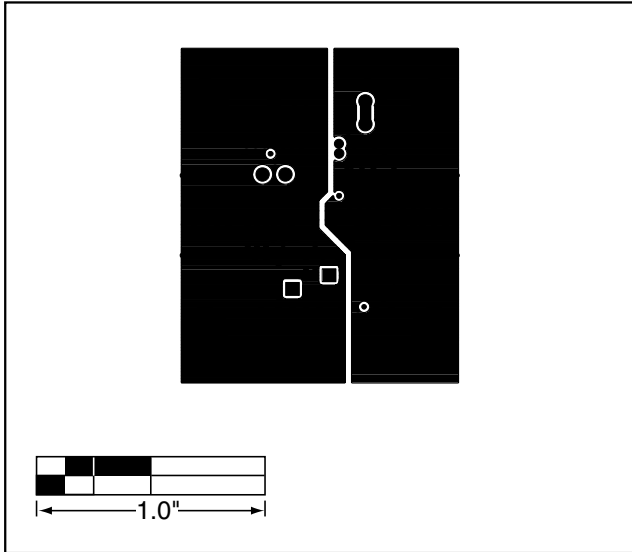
MAX2841 EV Kit PC Board Layout—Layer 2
